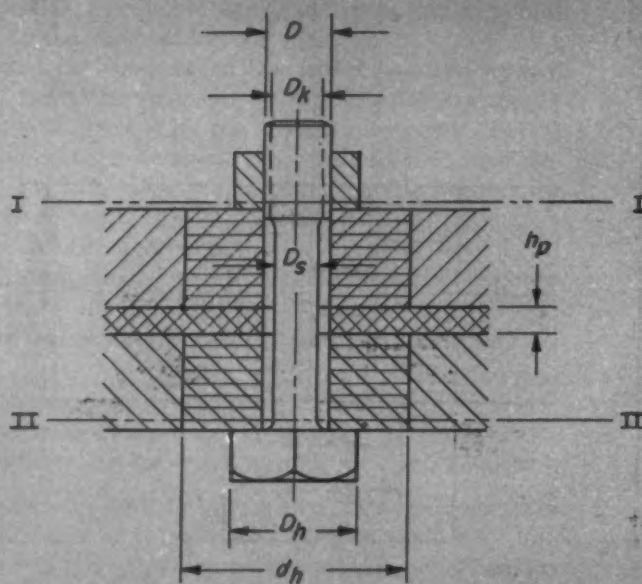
Flanges, with gasket or plate between, undergoing compressive deformation
